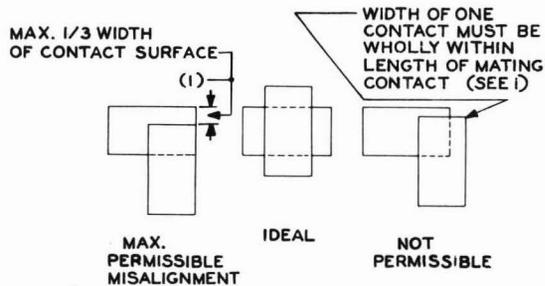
Fig. L — Alignment of Heavy Contacts — Plan View of Contact Surfaces
